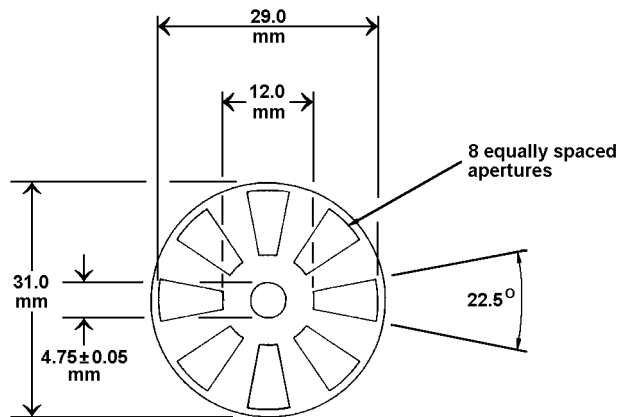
, Model 652-2 Chopper Blade Dimensions
